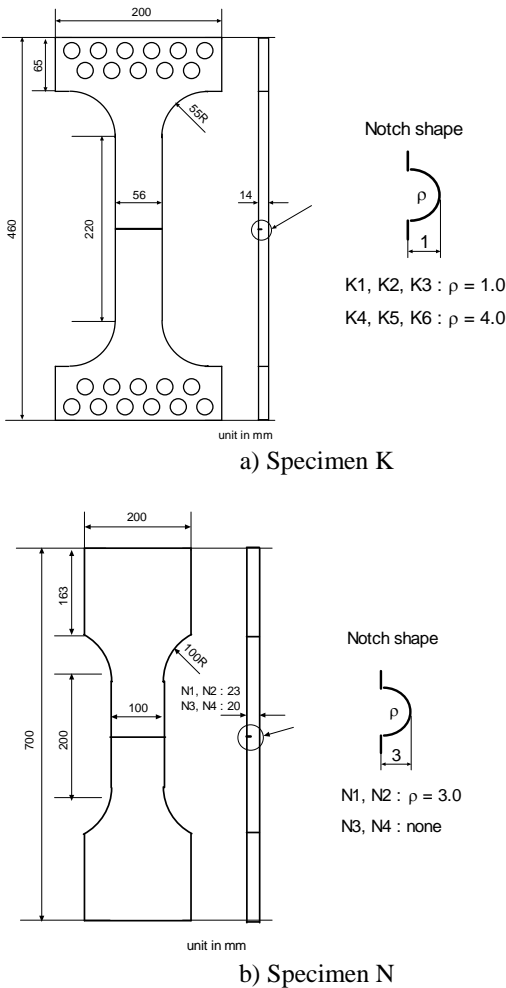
CONFIGURATION OF THE CRACKED SPECIMENS.
